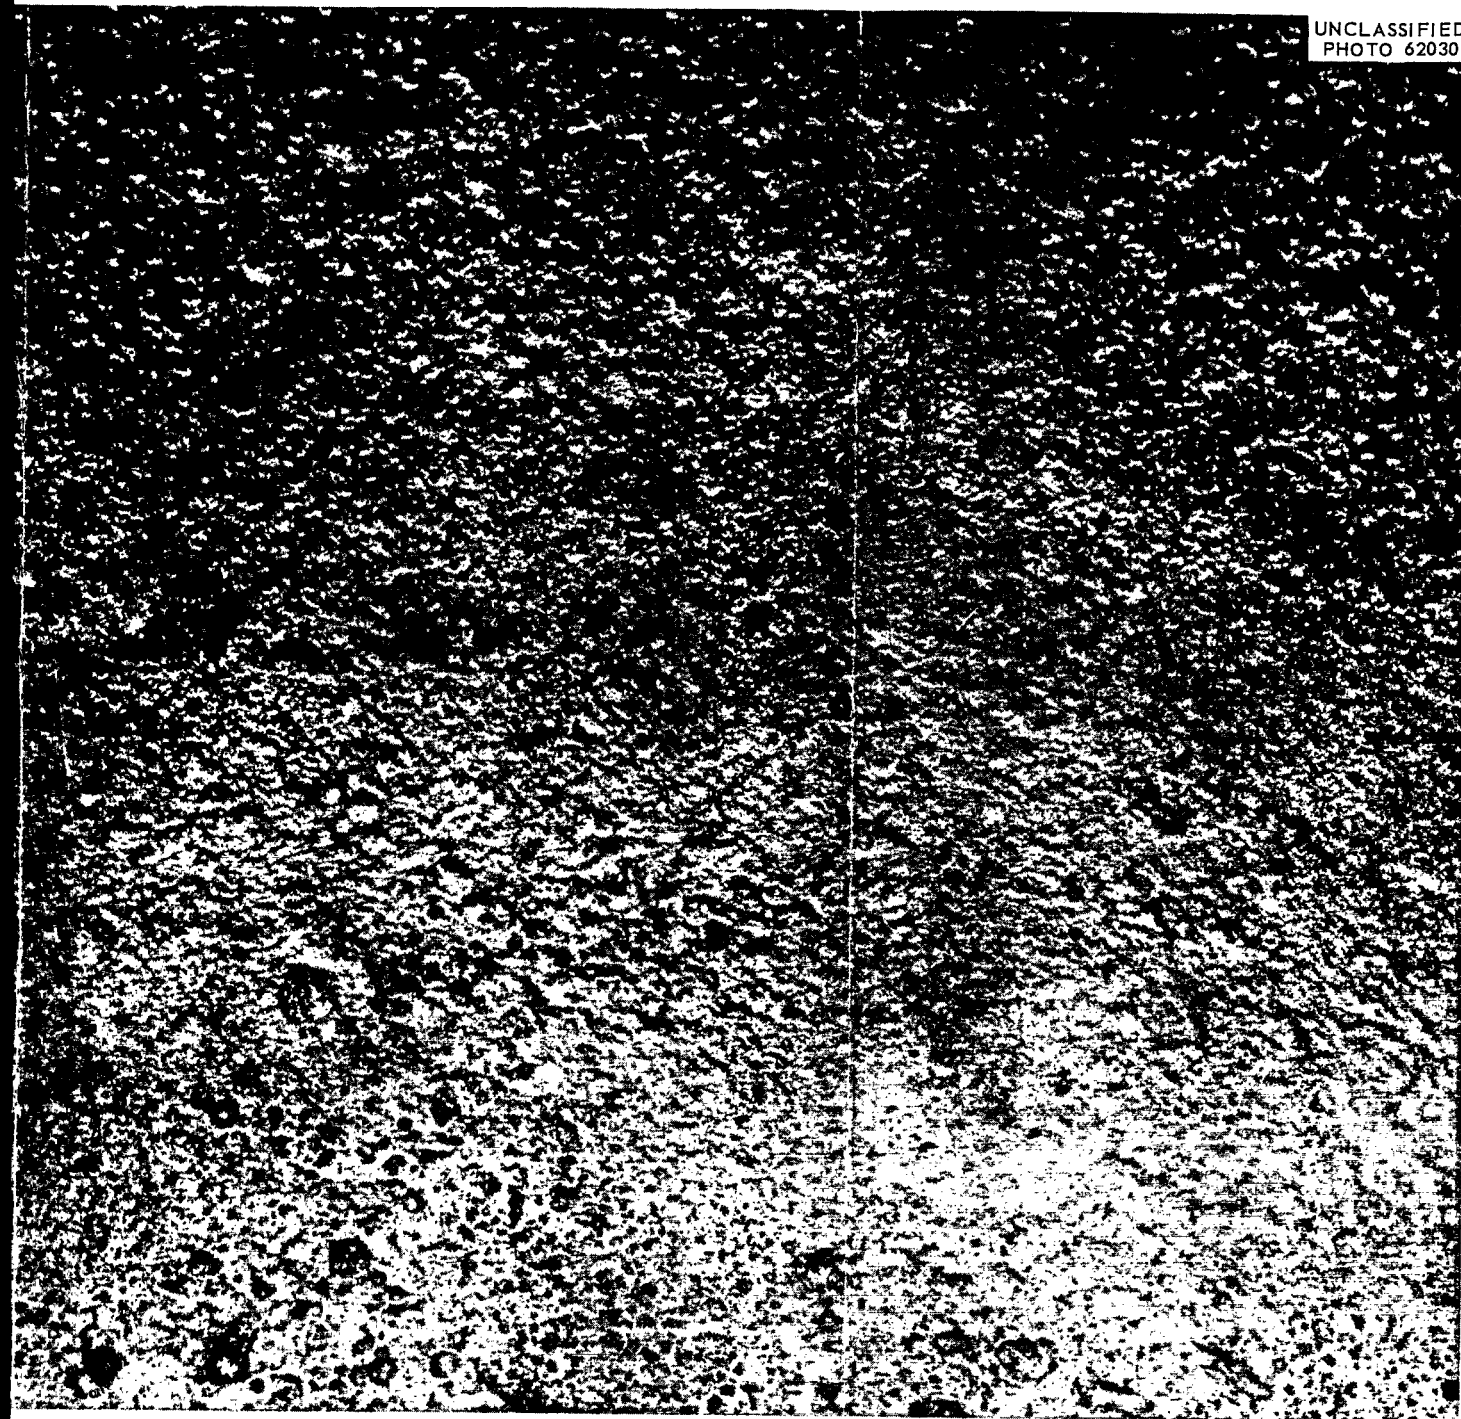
Inside of Melting Pot, Showing Corrosion Pitting. The
